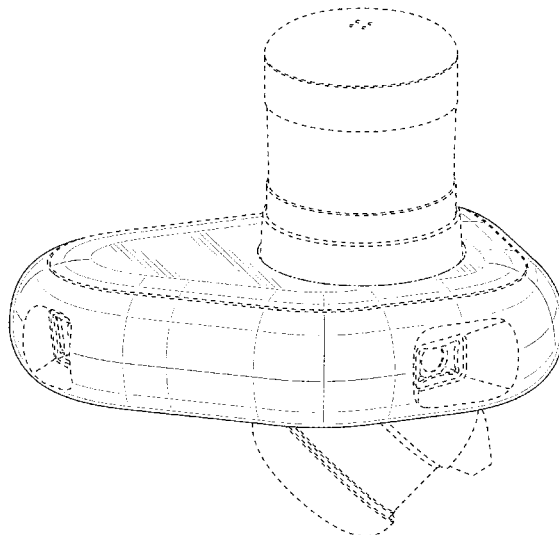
is a top, right-side perspective view of a sensor housing;
